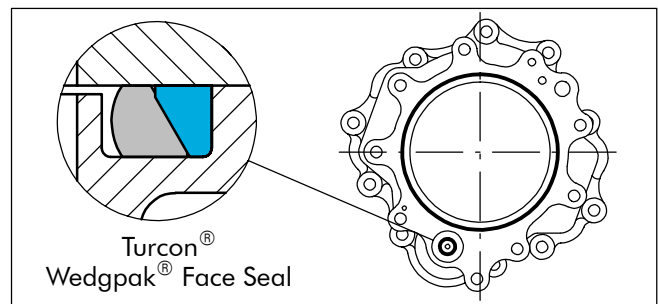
Engine Driven Hydraulic Pump Flange Seal Retrofit
